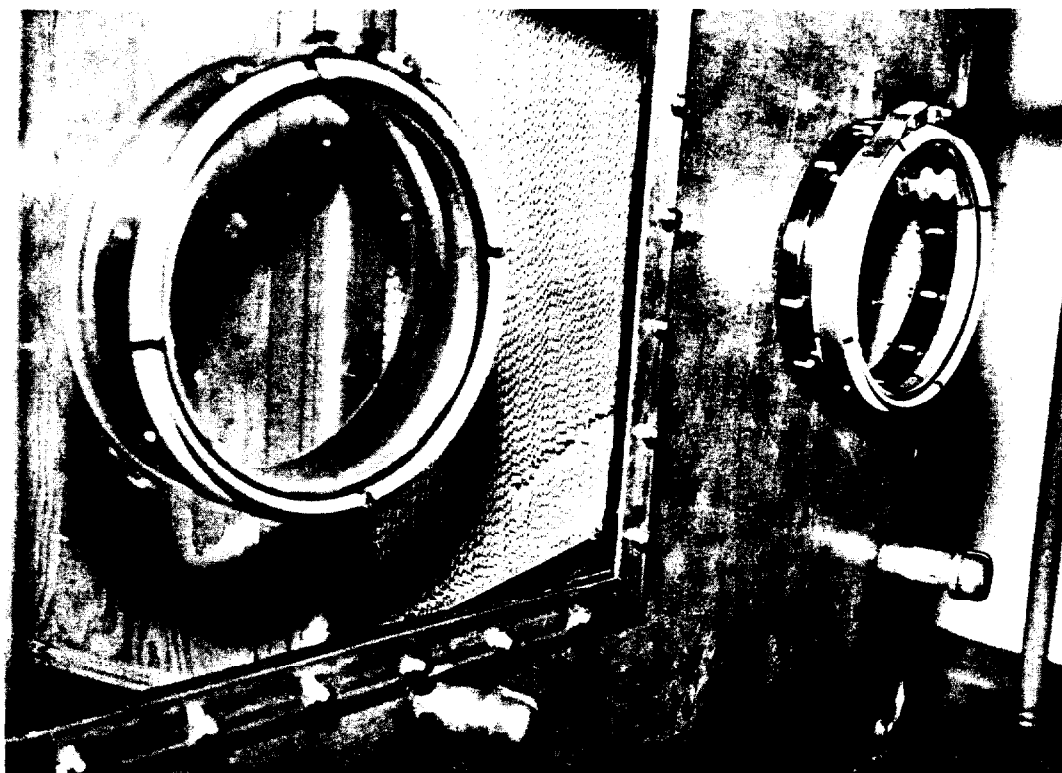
Gasket leak test. Test chamber under pressure. Soap solution used. Note leakage at frame joints.
